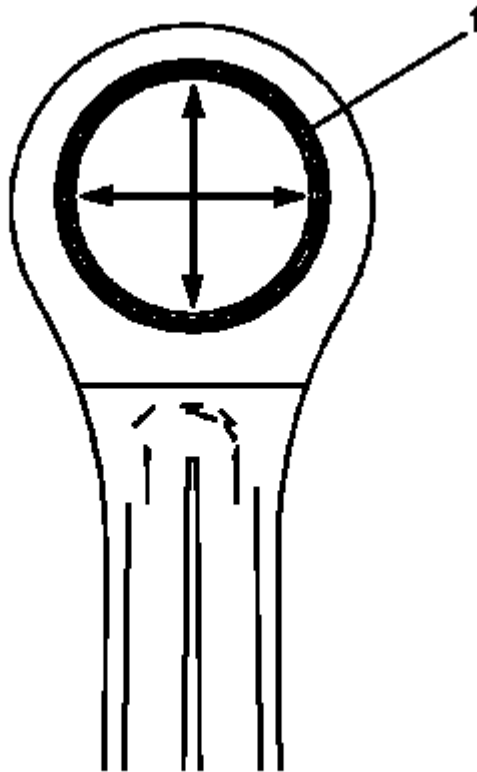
Identifying Connecting Rod Piston Pin Bore
